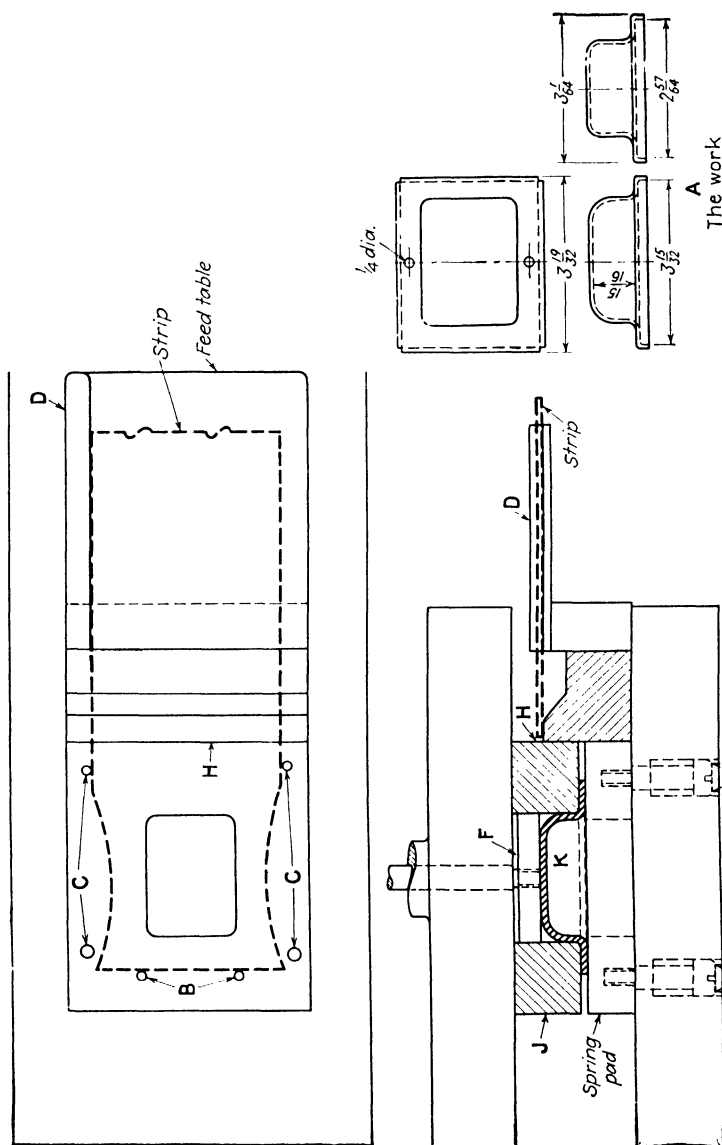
The blank is cut from the strip at *H*, the cover is then drawn in this die, the strip being fed against pins *B* and guided by gauge *D* on the feeding table.
